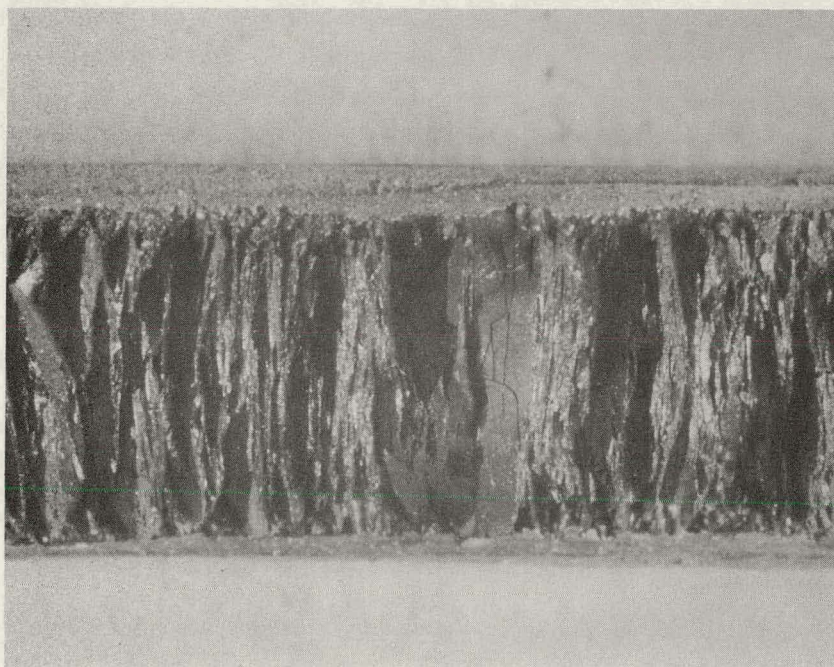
Pellet Fracturing and Clad Damage at 6.5 Percent Reduction (40B-0-3...9.1x)
